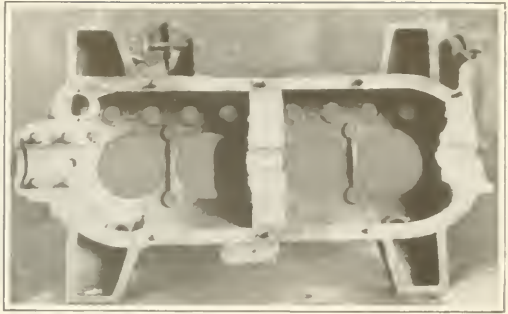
Upper Half of Crank-case as shown in Fig. 20 with welding completed
